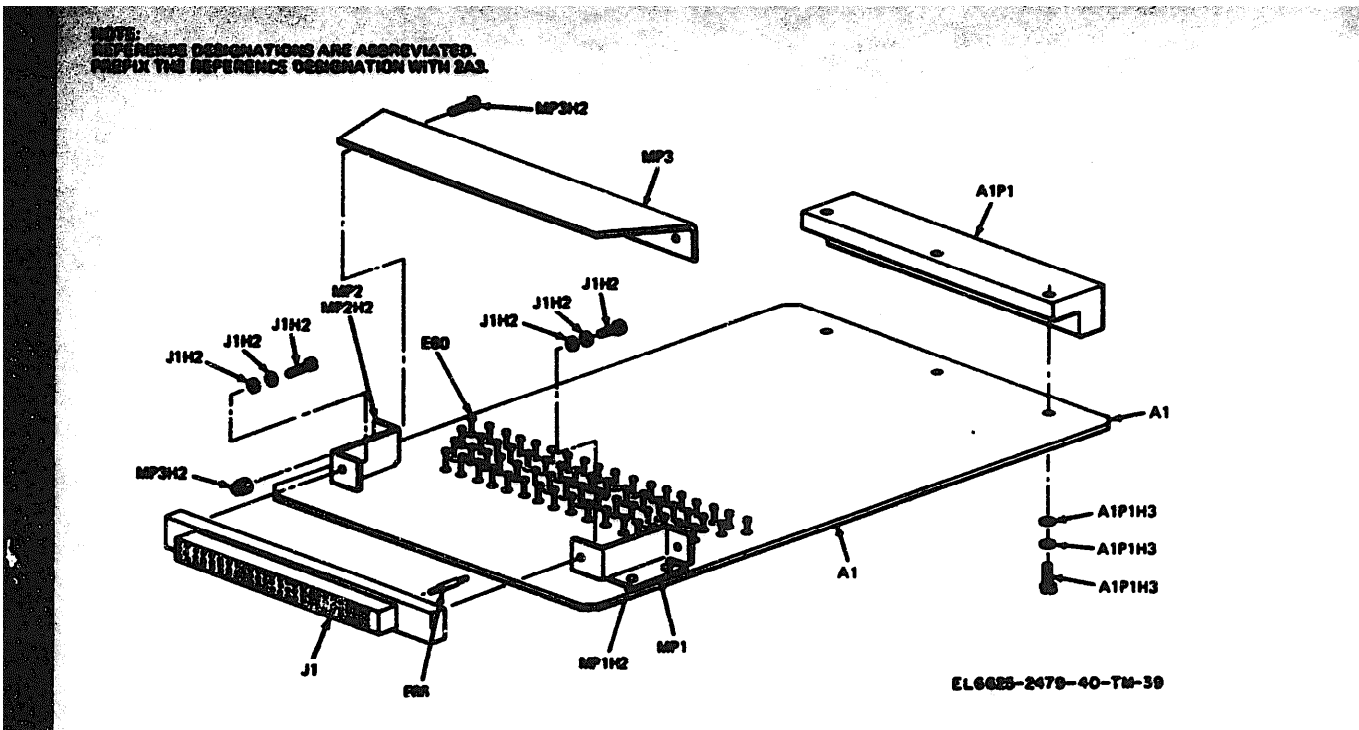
Extender, Circuit Card MX-3966/AYM, parts location.
